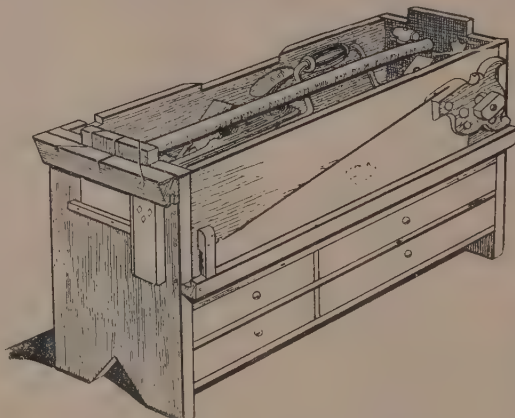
USEFUL TYPE OF TOOL STOOL. 23 INS. BY 15 INS.
